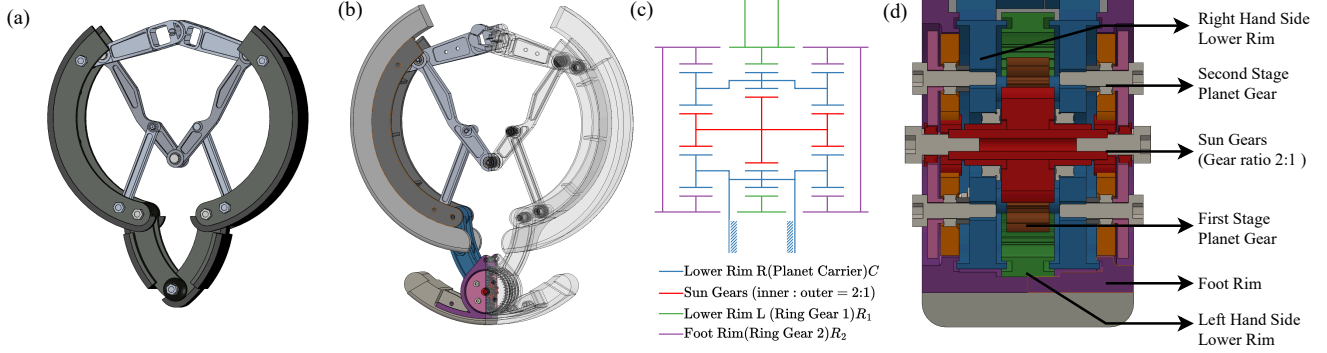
The CAD illustration of the leg-wheel mechanism: (a): The front view of the original leg-wheel mechanism. (b): cross-section view of the leg-wheel. (c) The kinematic diagram of the planetary gear transmission. (d) The blow-up cross-section view of the planetary gear transmission.
